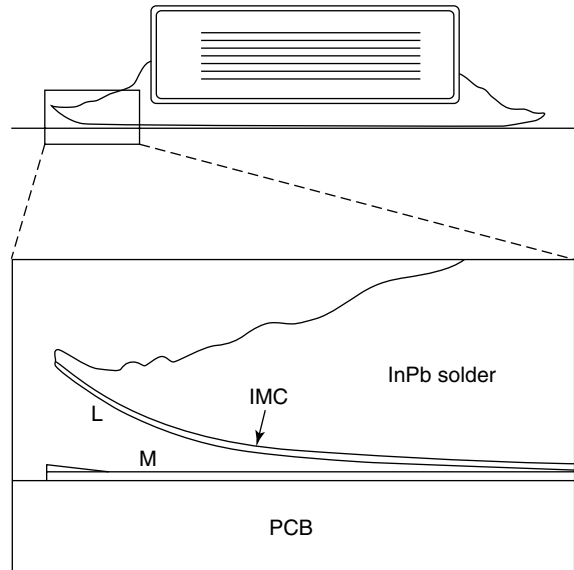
The peeling solder joints after temperature cycling. EDX of surface L shows the presence of Au, In and Pb. Surface M is mostly Au with some In. The substrate metallization is 100  $\mu$ -in. Au, for both soldering and wire bonding purpose. The solder used is In/Pb alloy. (Source: Hughes Aircraft)
